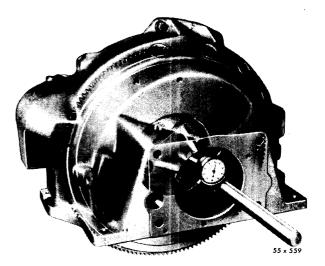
Fixture C-869 Installed to Check Clutch Housing Bore (Typical View)
